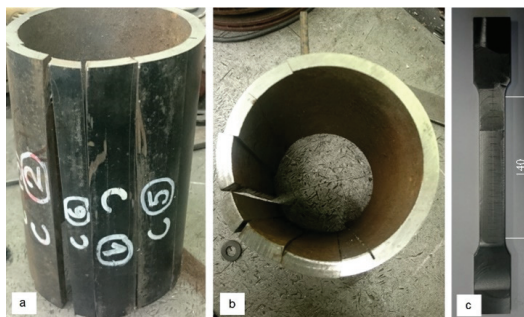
The blanks for specimens: (a) number of blanks; (b) orientations of blanks (c) specimen.
